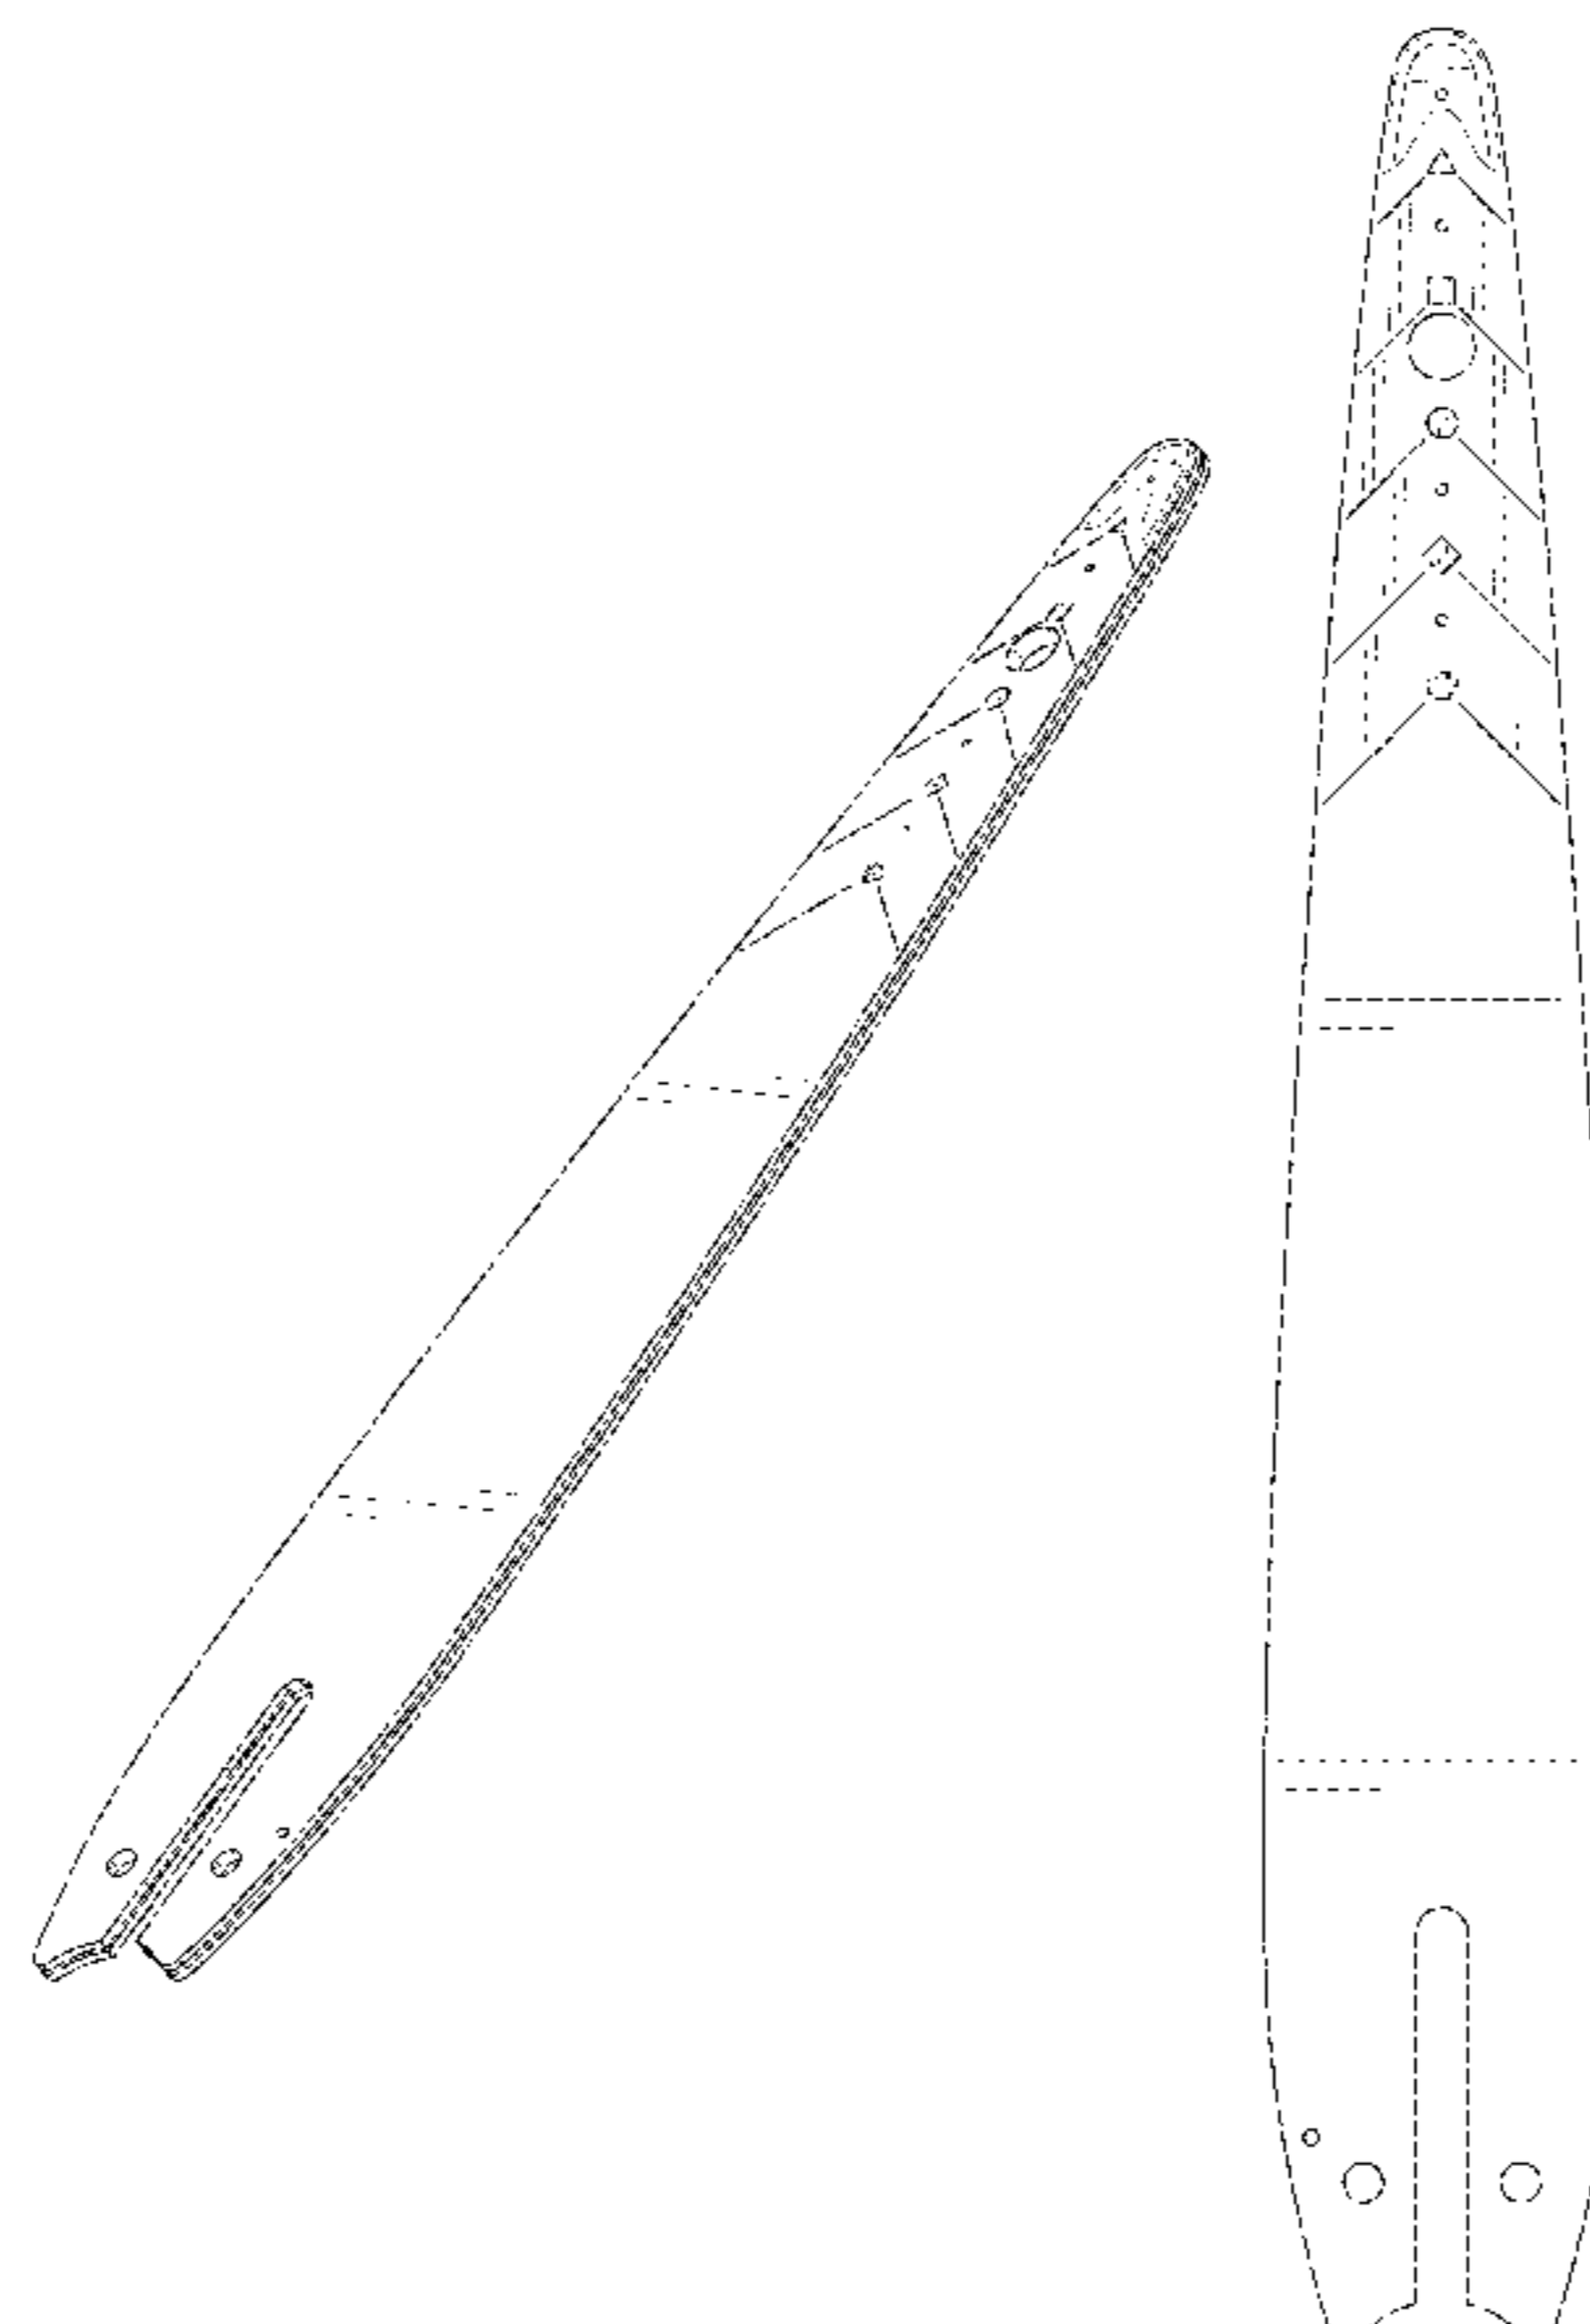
is a top view of the carving guide bar shown in FIG. 1; FIG. 5 is a bottom side view of the carving guide bar shown in FIG. 1;
